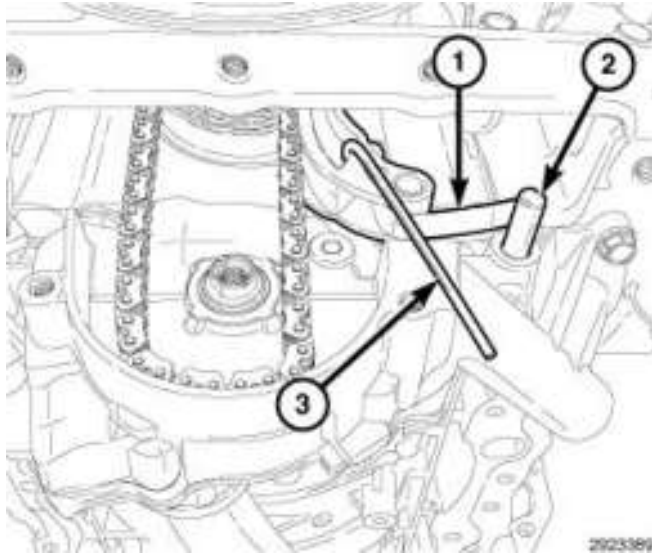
Retaining Pin, Oil Pump Chain Tensioner Spring & Dowel Pin
